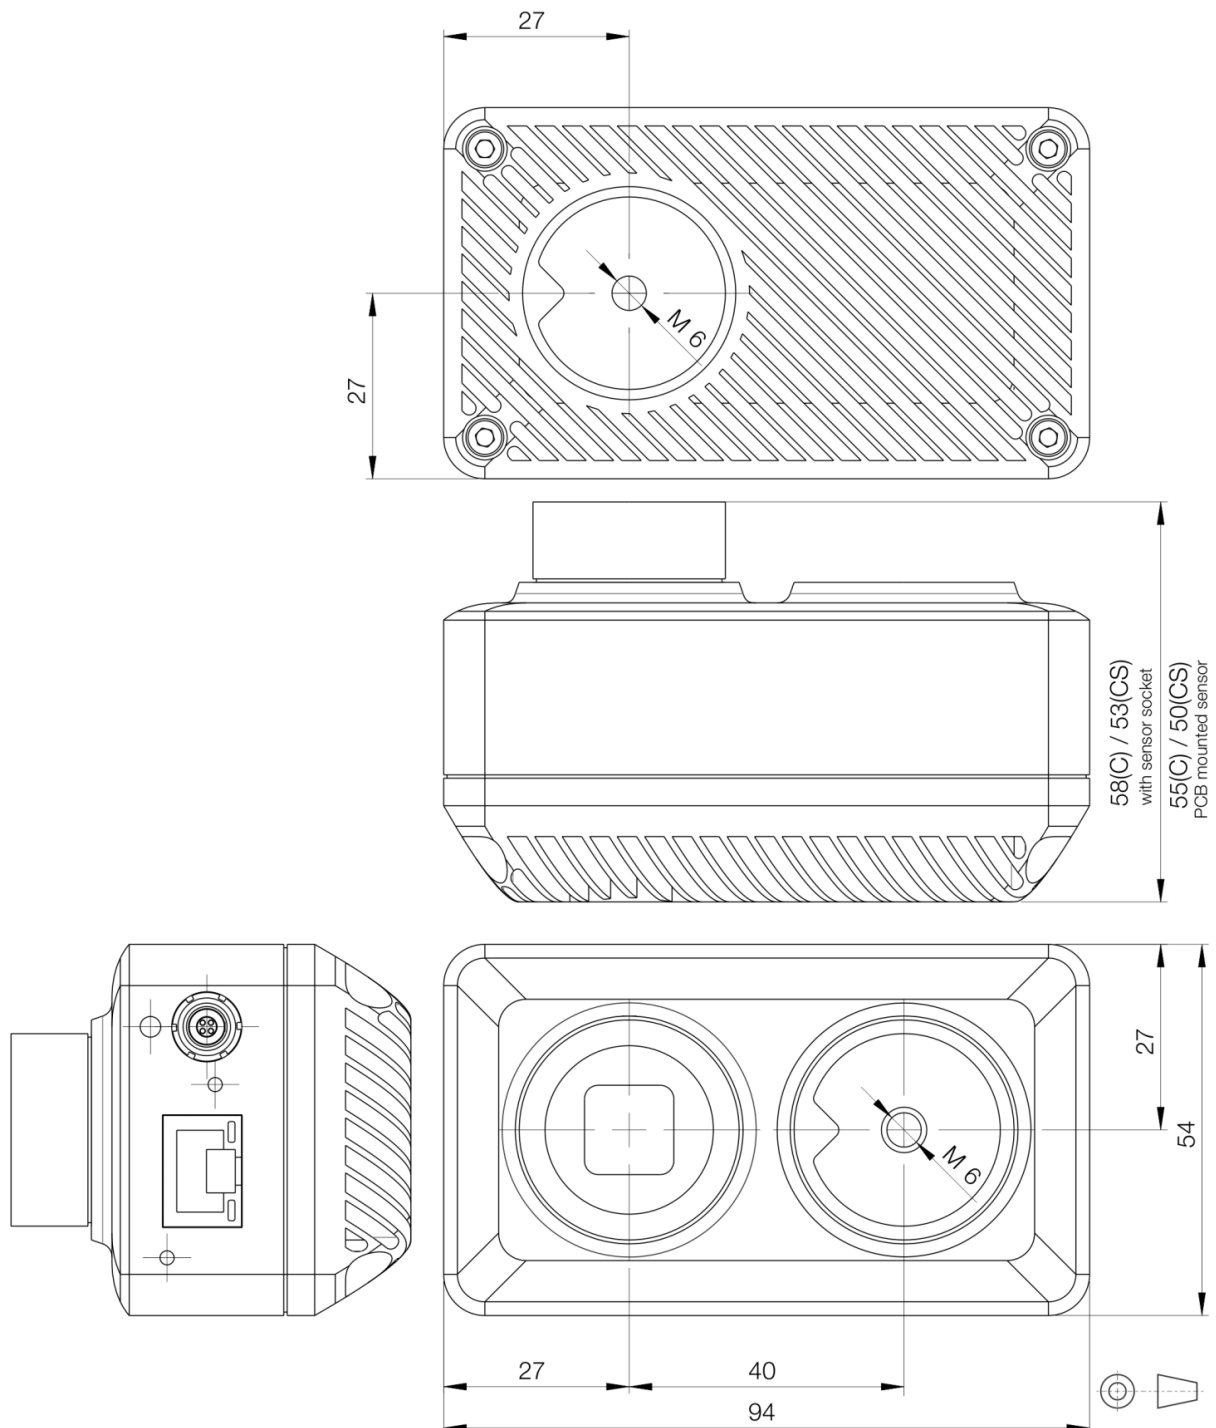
Velociraptor HS in a housing with C-mount lens holder
